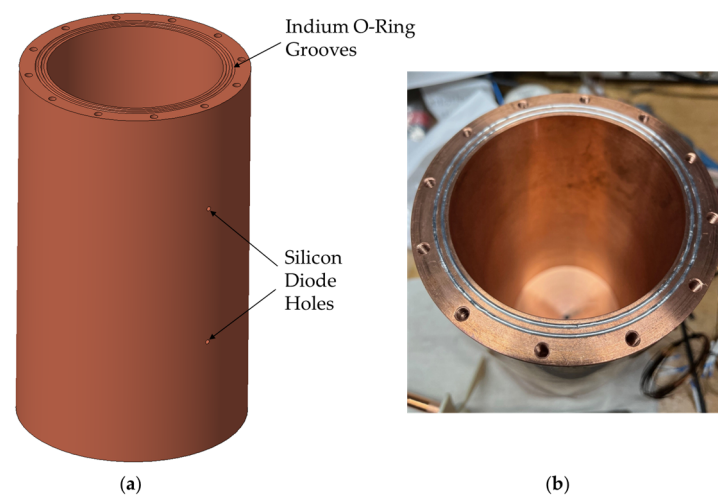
(a) CAD model of the copper specimen cup; (b) indium o-rings installed.
